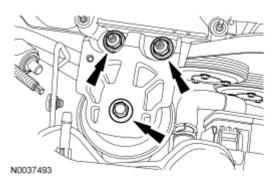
Locating Engine Mount Bracket Bolt And Nuts Courtesy of FORD MOTOR CO.
